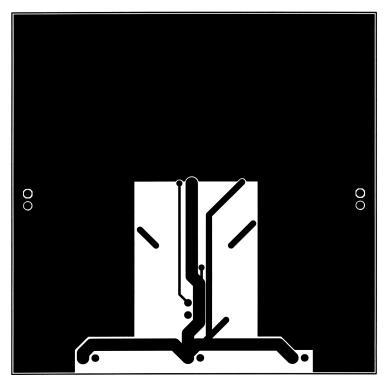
Recommended KTW SE PCB Layout: Bottom Layer
